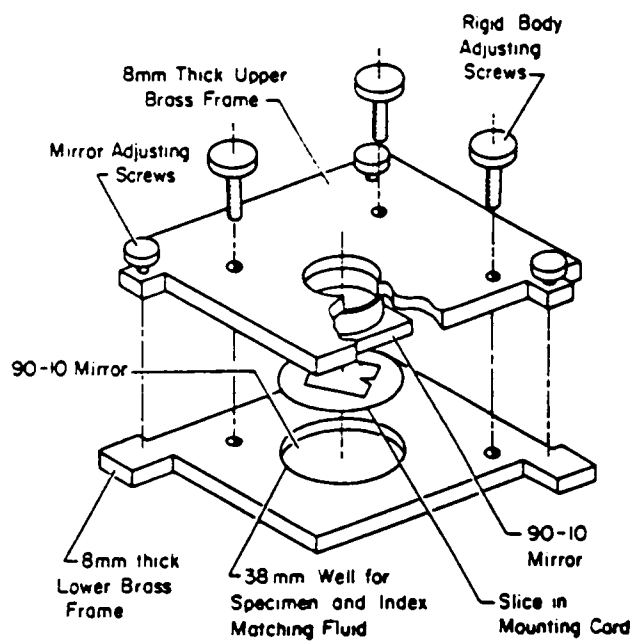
A blow up of the fixture used in the fringe multiplier unit [46].
